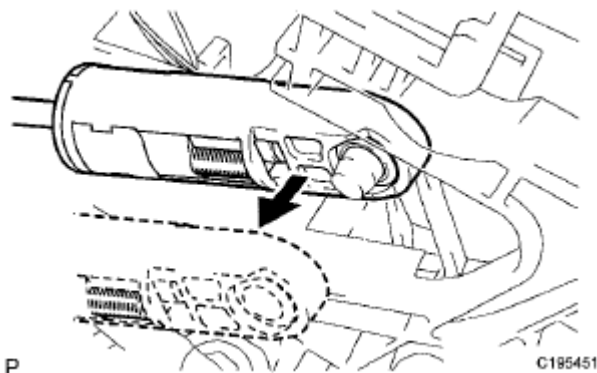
Disconnecting Cable End And Shift Lever Assembly
